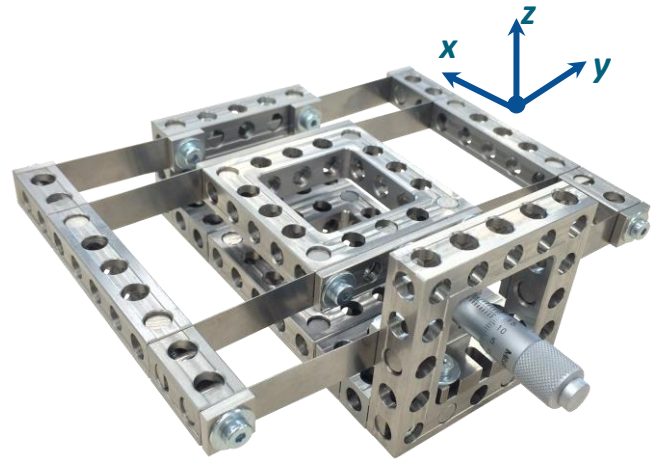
Double compound linear translation stage assembled using MechBlocks from Motus Mechanical.
